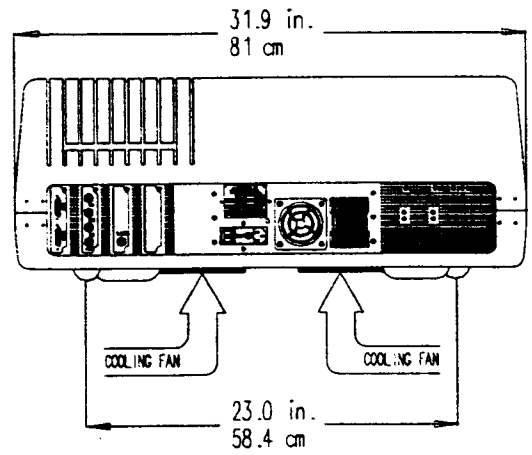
AMPRO 4600 CASE DIMENSIONS.
